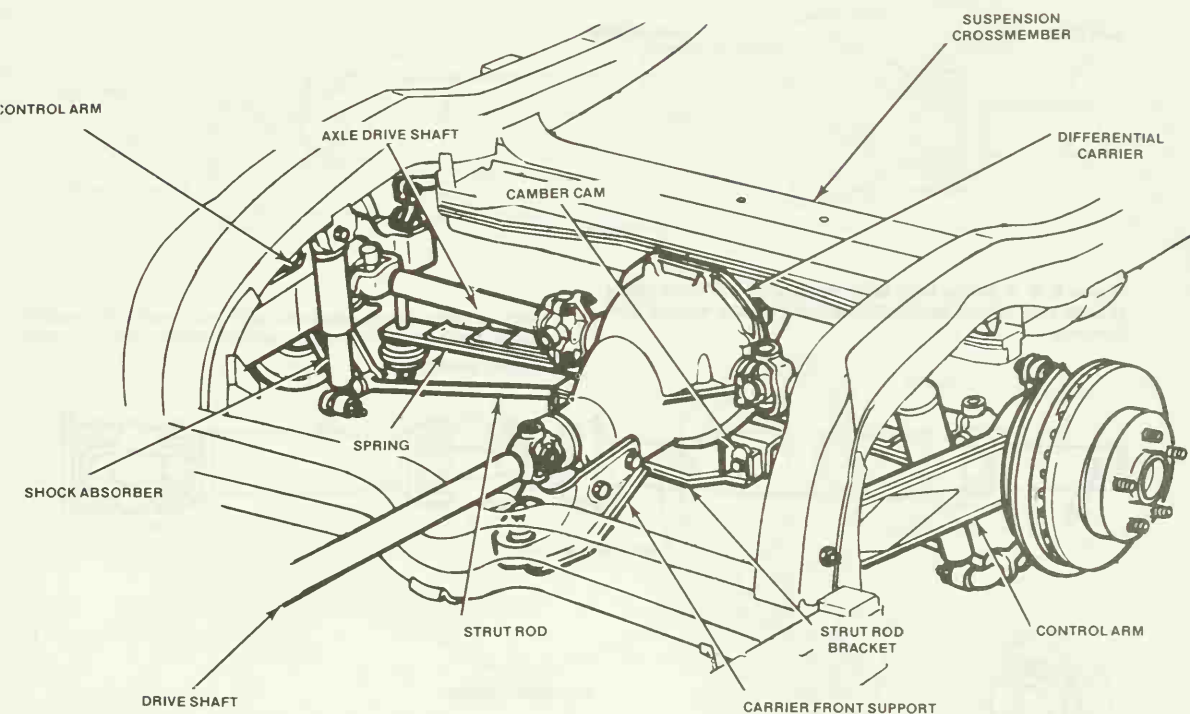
The differential carrier is solidly mounted to the frame in an independent rear suspension. (Chevrolet Motor Division of General Motors Corporation)
